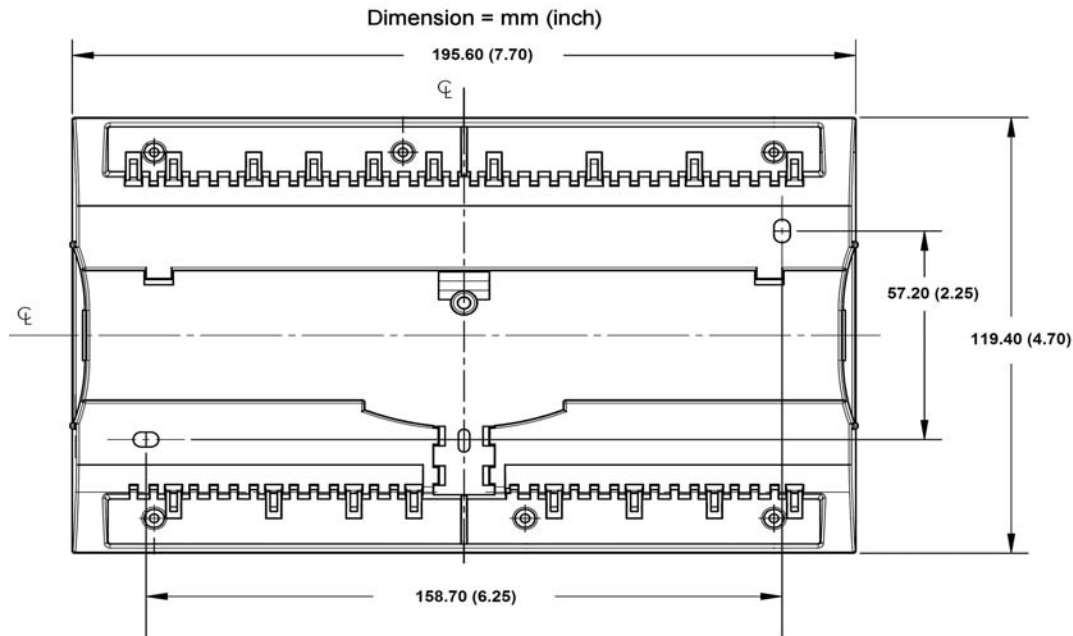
LN PRG600 Series Controller Dimensions, mm (in.)
